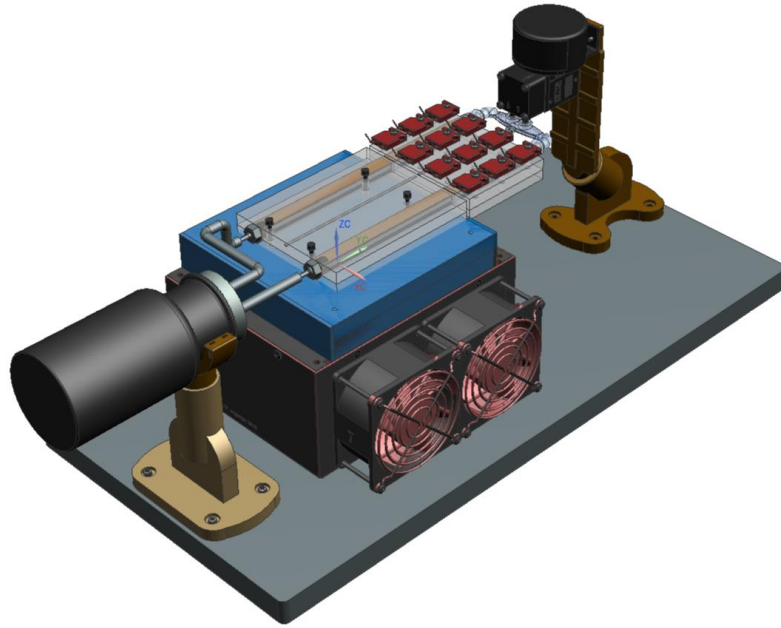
Prototype #3: Active cooling by diaphragm pump and conventionally assembled cold plate including 3-piece SLM aluminum alloy block, gauge 20 silver off-the-shelf plate.
